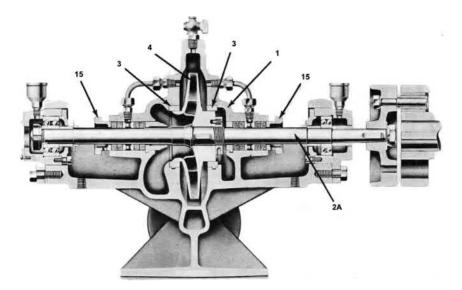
Section of a single-suction, single-stage centrifugal pump without shaft sleeves (numbers refer to parts listed in Table 3.14).
